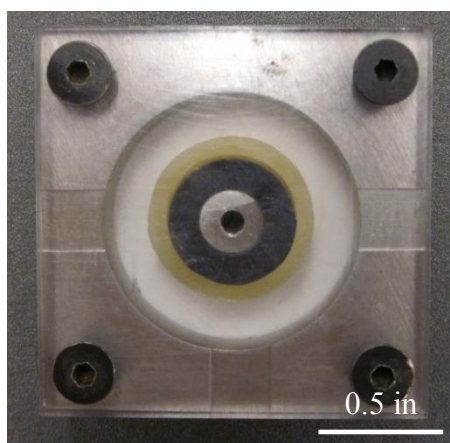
Ring-shaped mold with foam centerpiece and three overflow ports.
